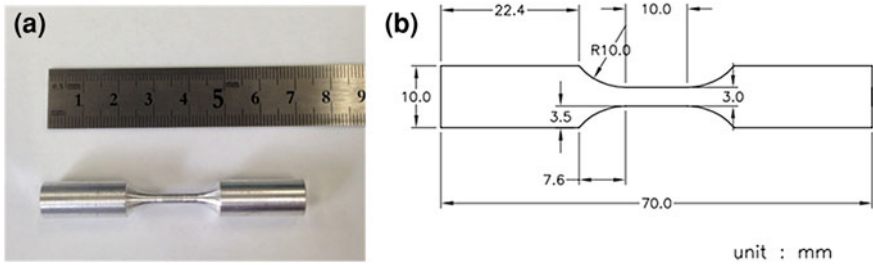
Round dumb-bell specimen. a Macro-view of the specimen b dimensions of the specimen
